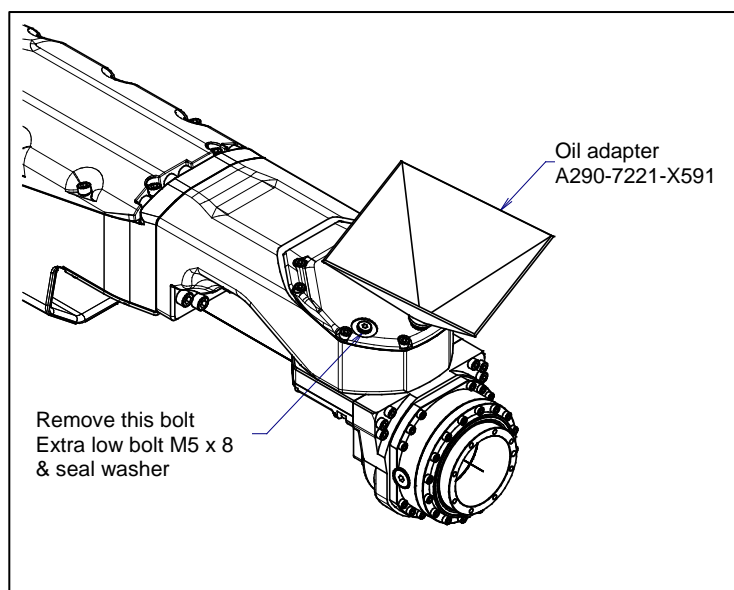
(e) Oil adapter (supplying oil J5/J6-axis gearbox)
